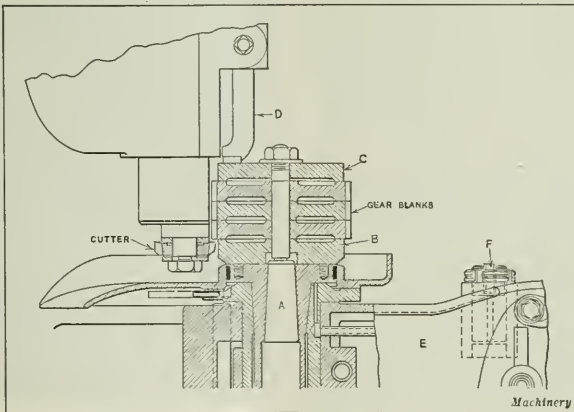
Typical Method of holding Stack of Three Spur Gears
